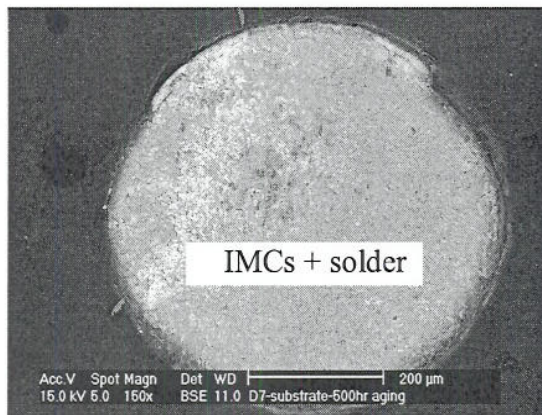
Fracture surface of the solder joint ( substrate pad sided) for a 0.35  $\mu\text{m}$  thick Ni and a 1.3  $\mu\text{m}$  thick Au layer aged for 500 h at 150°C.
